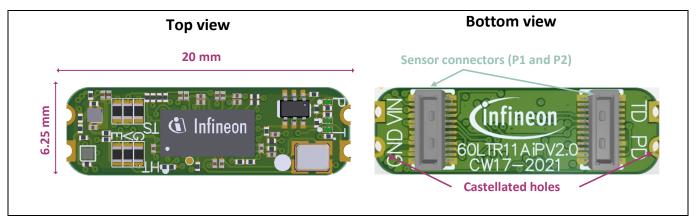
Top and bottom views of the BGT60LTR11AIP shield
